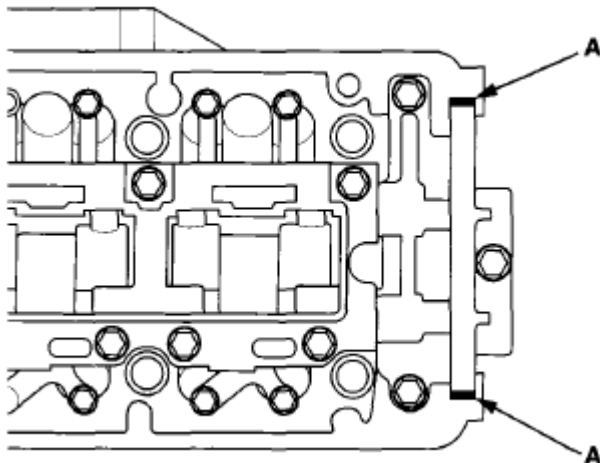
Identifying Rocker Shaft Holder Mating Area
